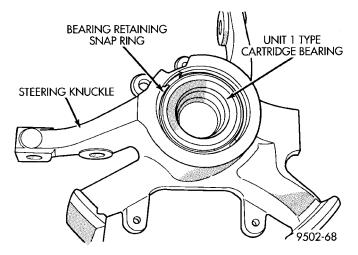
Hub Bearing Retaining Snap Ring Installed
